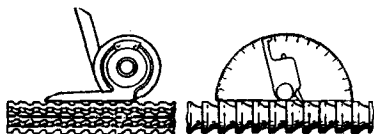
Face angle of a new broach should be measured before use and checked after sharpening. A combination hook and radius gage, right, determines face angle and proper curvature of chip space.
